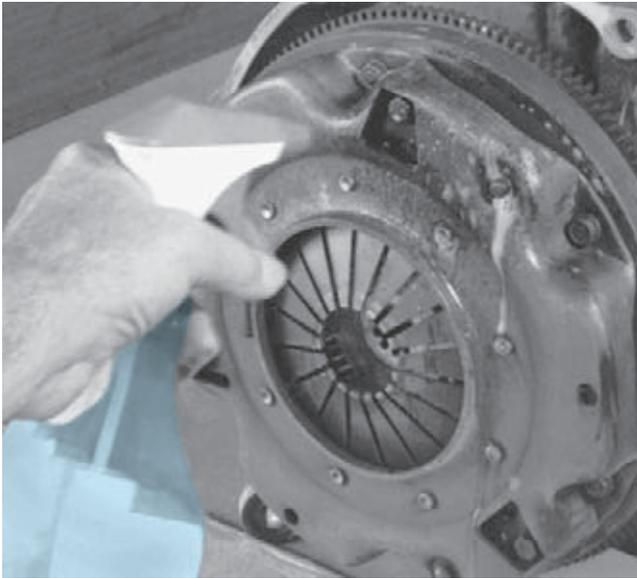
Before disassembly, it is a good practice to wash the pressure plate assembly and flywheel with a mixture of soap and water. This prevents airborne asbestos fibers and precleans the clutch cover.
